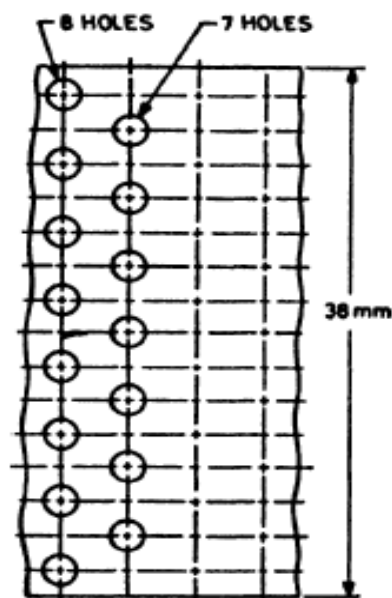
STAGGERING OF 7/8 HOLES IN A FILLET
